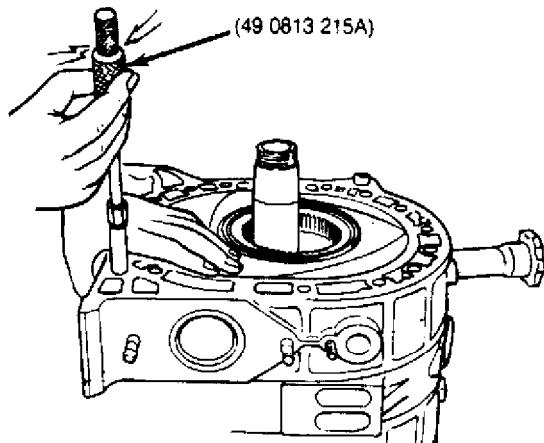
Extracting Tubular Dowels from Engine Hold housing down with hand.
